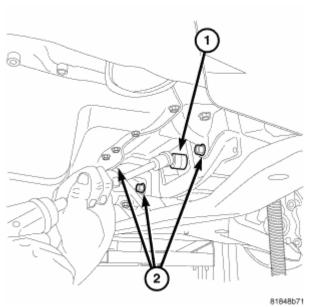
MODULAR CLUTCH TO FLEX PLATE BOLTS Courtesy of CHRYSLER LLC
